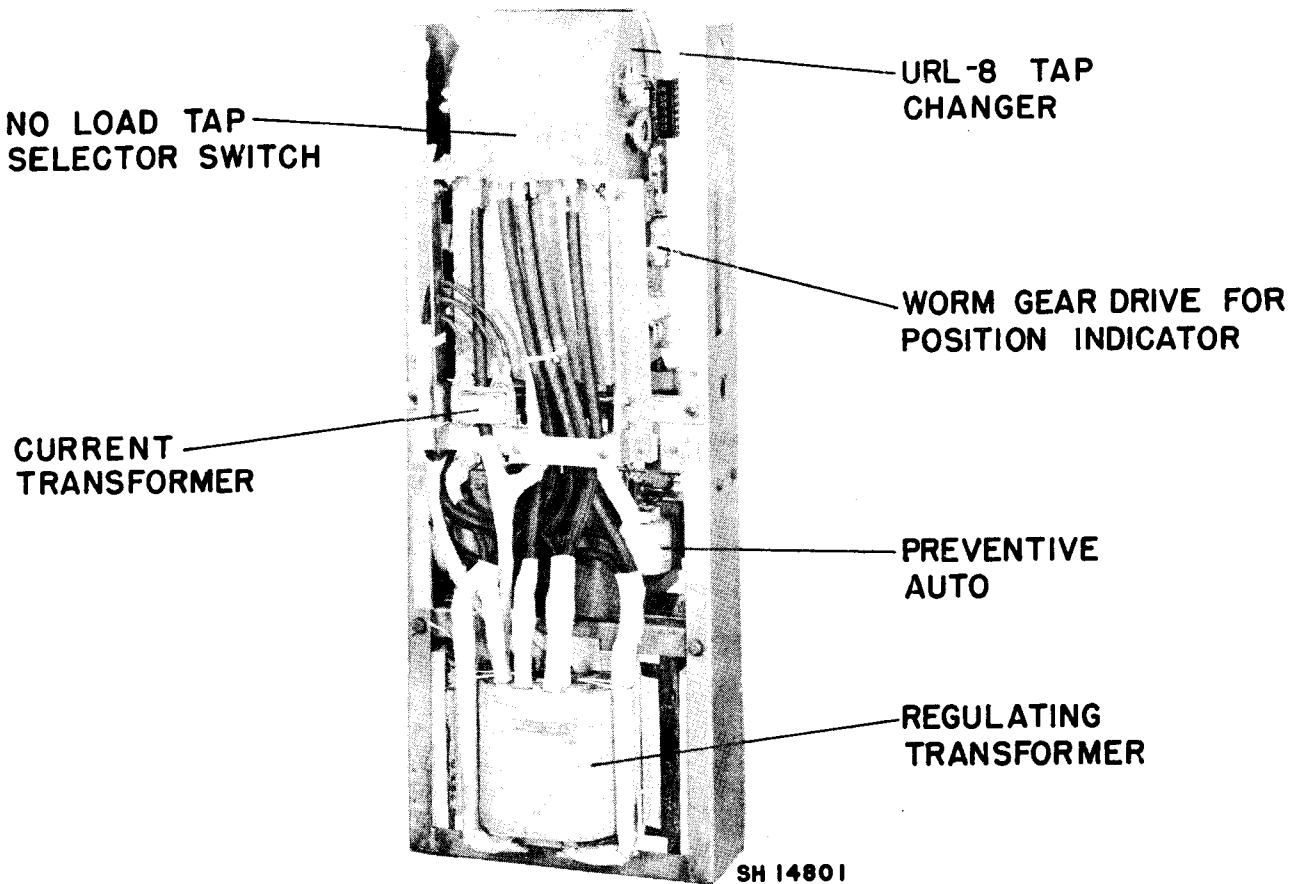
REGULATOR CORE AND COIL ASSEMBLY
